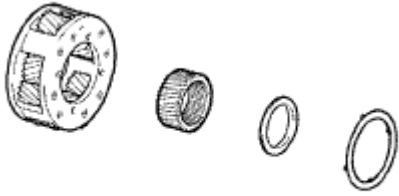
Identifying Front Planetary Gear And Thrust Needle Roller Bearing
